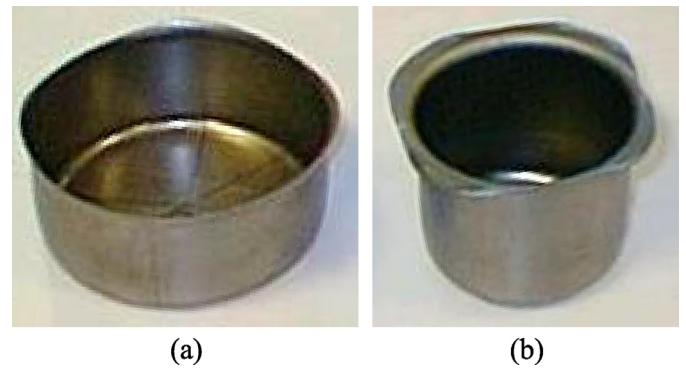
Experimental geometry of the cylindrical cup obtained by reverse deep drawing: (a) first stage; (b) second stage.
